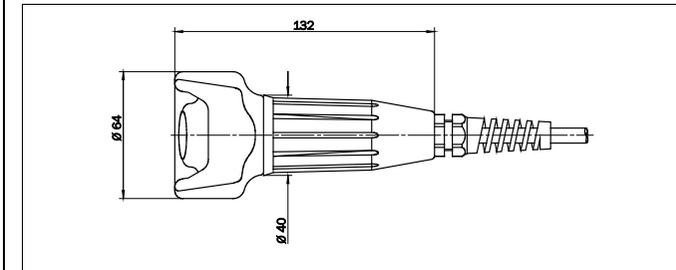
Dimensional drawing E100-A (enabling switch Standard)
